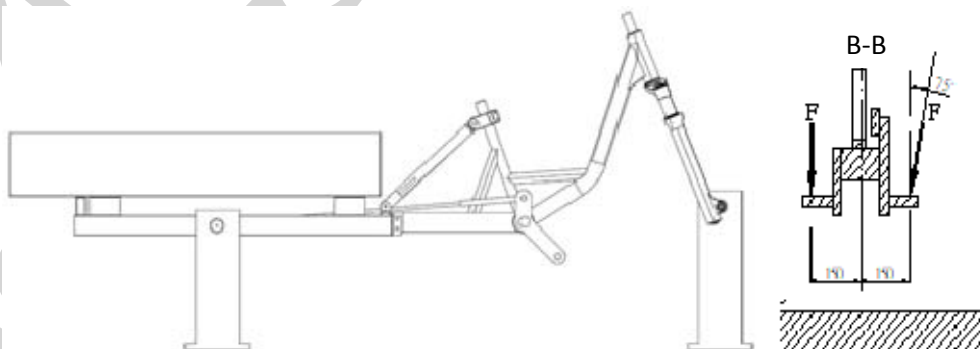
Frame and front fork assembly (Multi-lane): fatigue test with pedalling forces
